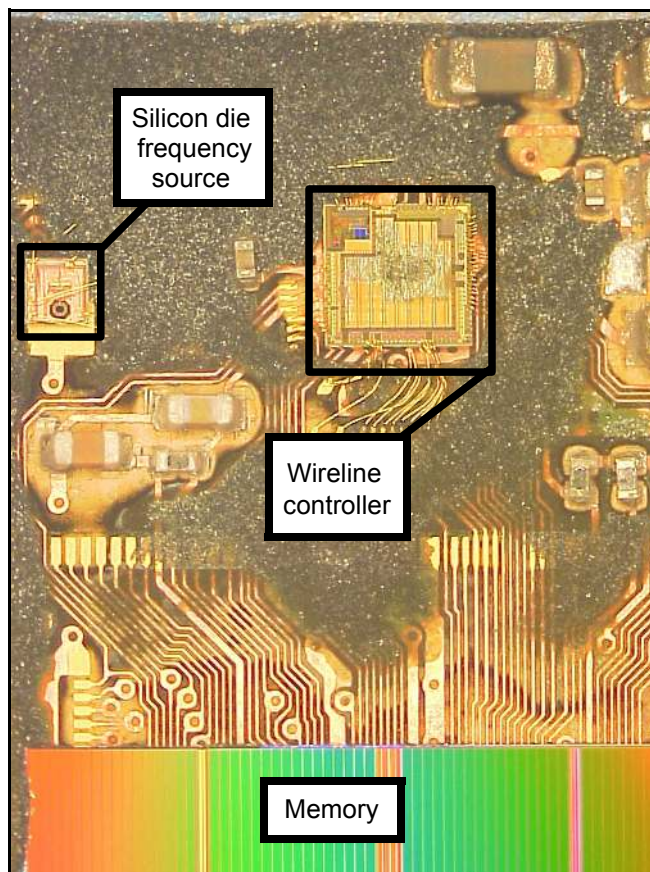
The silicon frequency source assembled via a CoB process in a USB drive-in-package (UDP). The Faraday shield has been dissolved with the package. Post-assembly test is not required because the die is 350 $\mu\text{m}$  thick.
